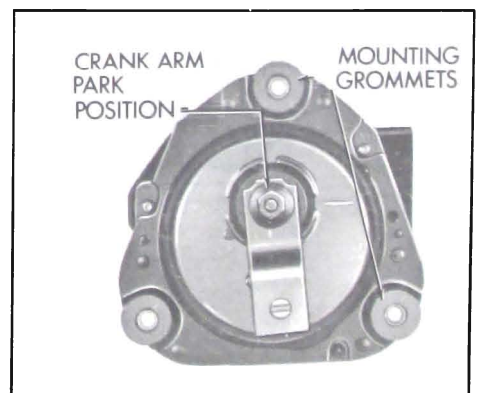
Single and Two Speed Wiper Mounting Grommets
